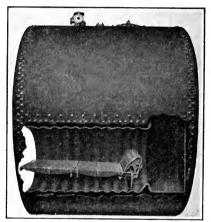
Wager bridge wall fitted in Scotch boiler.
